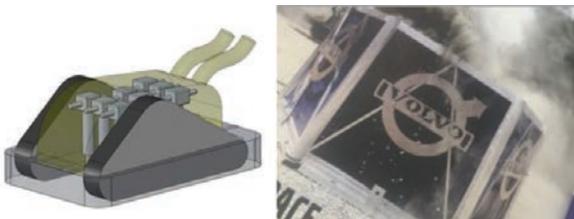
Urban mining prototypes concrete crusher (left) and on-site concrete storage (right).
